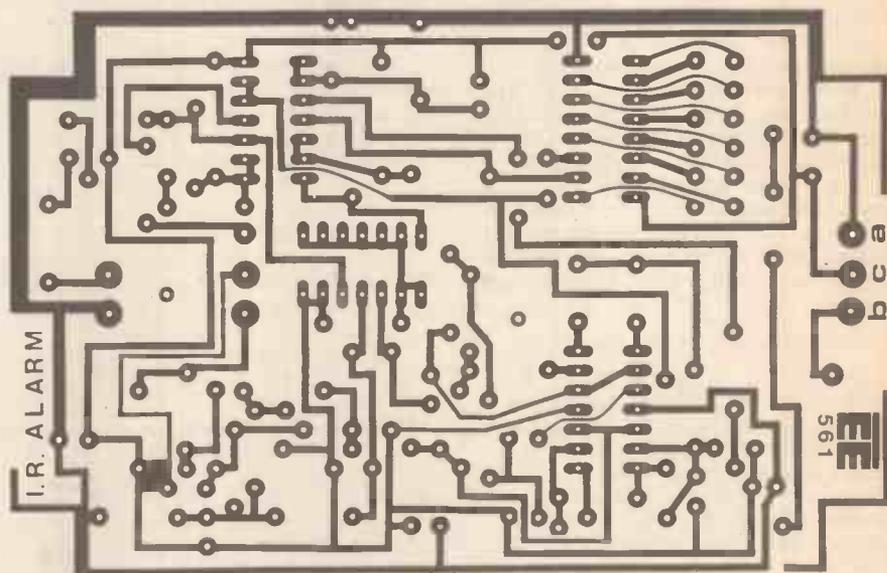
Full size printed circuit master pattern for the Infra Red Alarm—Detection Head.
